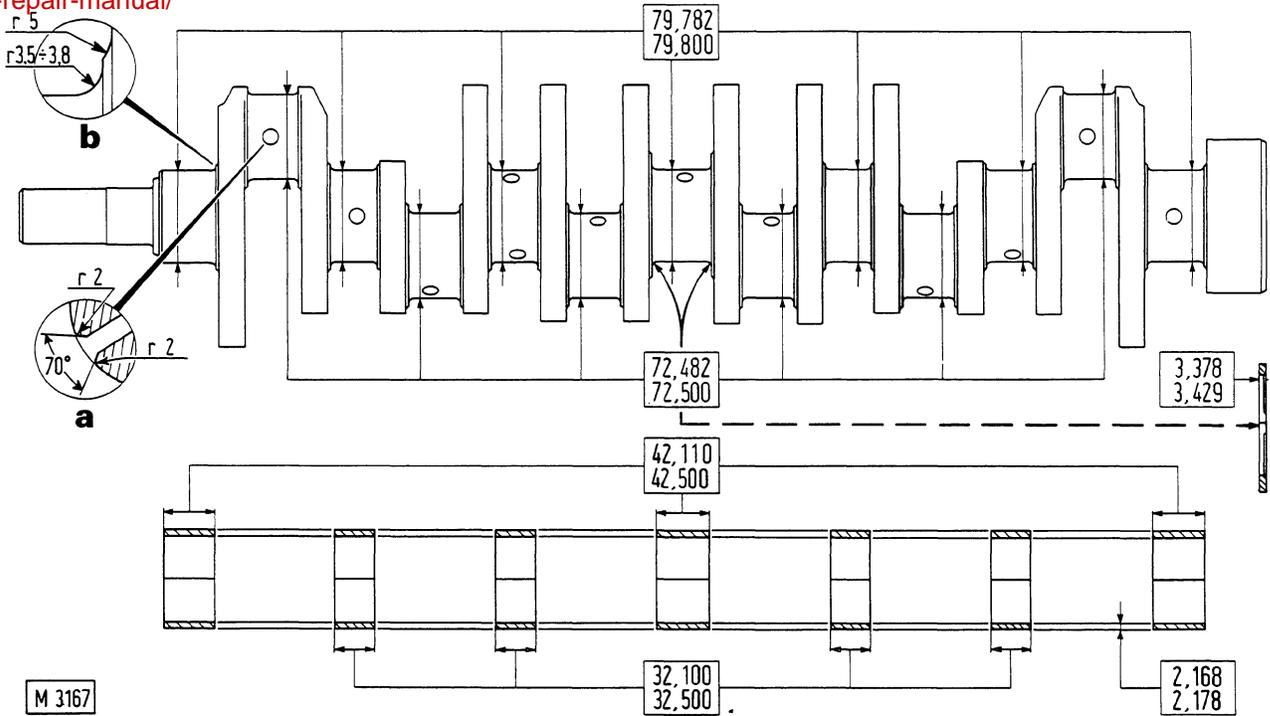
Standard dimensions of journals, main bearings and shells.
